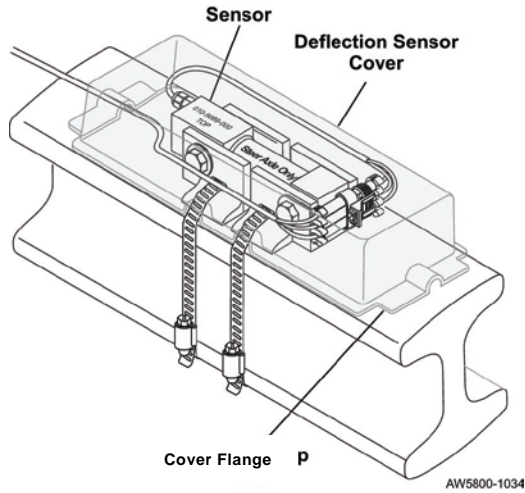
Placing the Cover Over the Deflection Sensor Assembly
